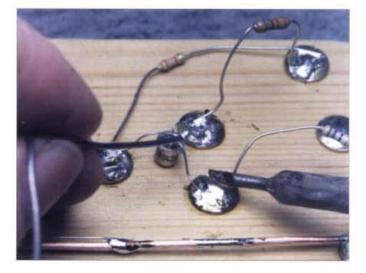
With care, once you have 'tinned' the top of the Drawing pin you'll be able to solder several points on to the pin without melting the solder on the whole of the head, thus not affecting the other joints (see text).
